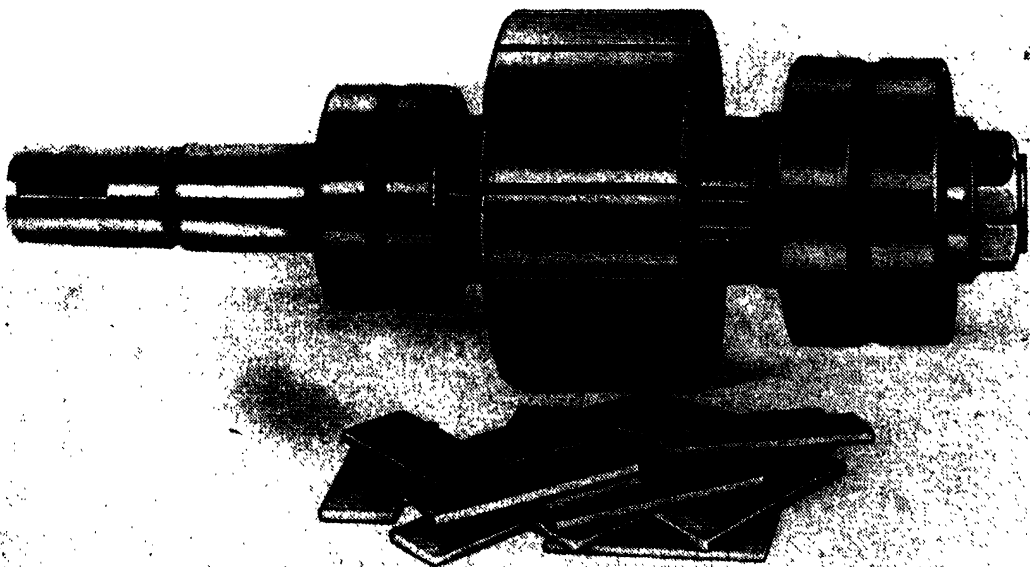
Shaft and rotor assembly of variable-delivery vane pump. (*Racine Tool and Machine Co., Racine, Wis.*)
